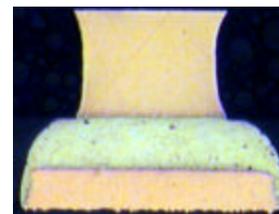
shows a cross-sectional view of package A. Again, good wetting was observed. This was the only package with a metallized resin bump, rather than just a flat pad on the bottom. Together with a gap size essentially fixed by the solder between die paddle and PCB pad this lead to a minimum solder height of less than 1 mil. While this is not inherently a problem for reliability, (the resin presumably offers compliance and reduces thermal cycling stresses on the solder), it had a clear effect on voiding (see Table 2).
